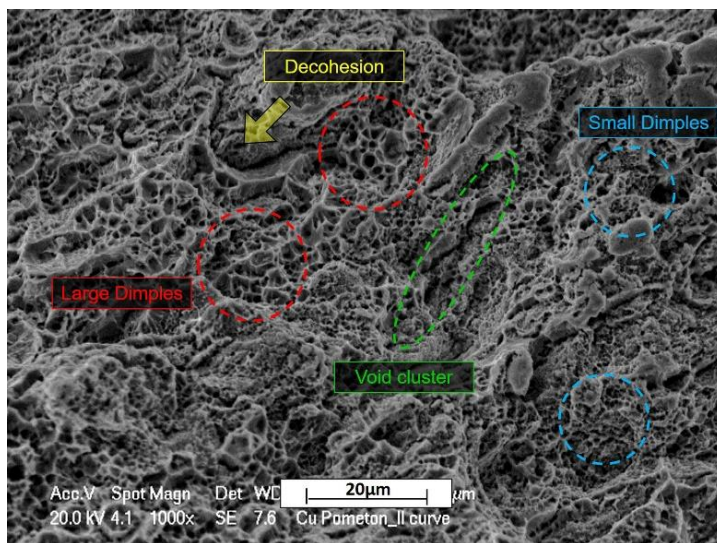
Fracture surfaces of the sintered AT-Cu specimen.
